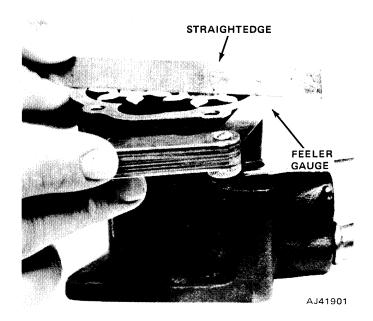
A-33 Oil Pump Gear End Clearance Measurement —Straightedge Method
